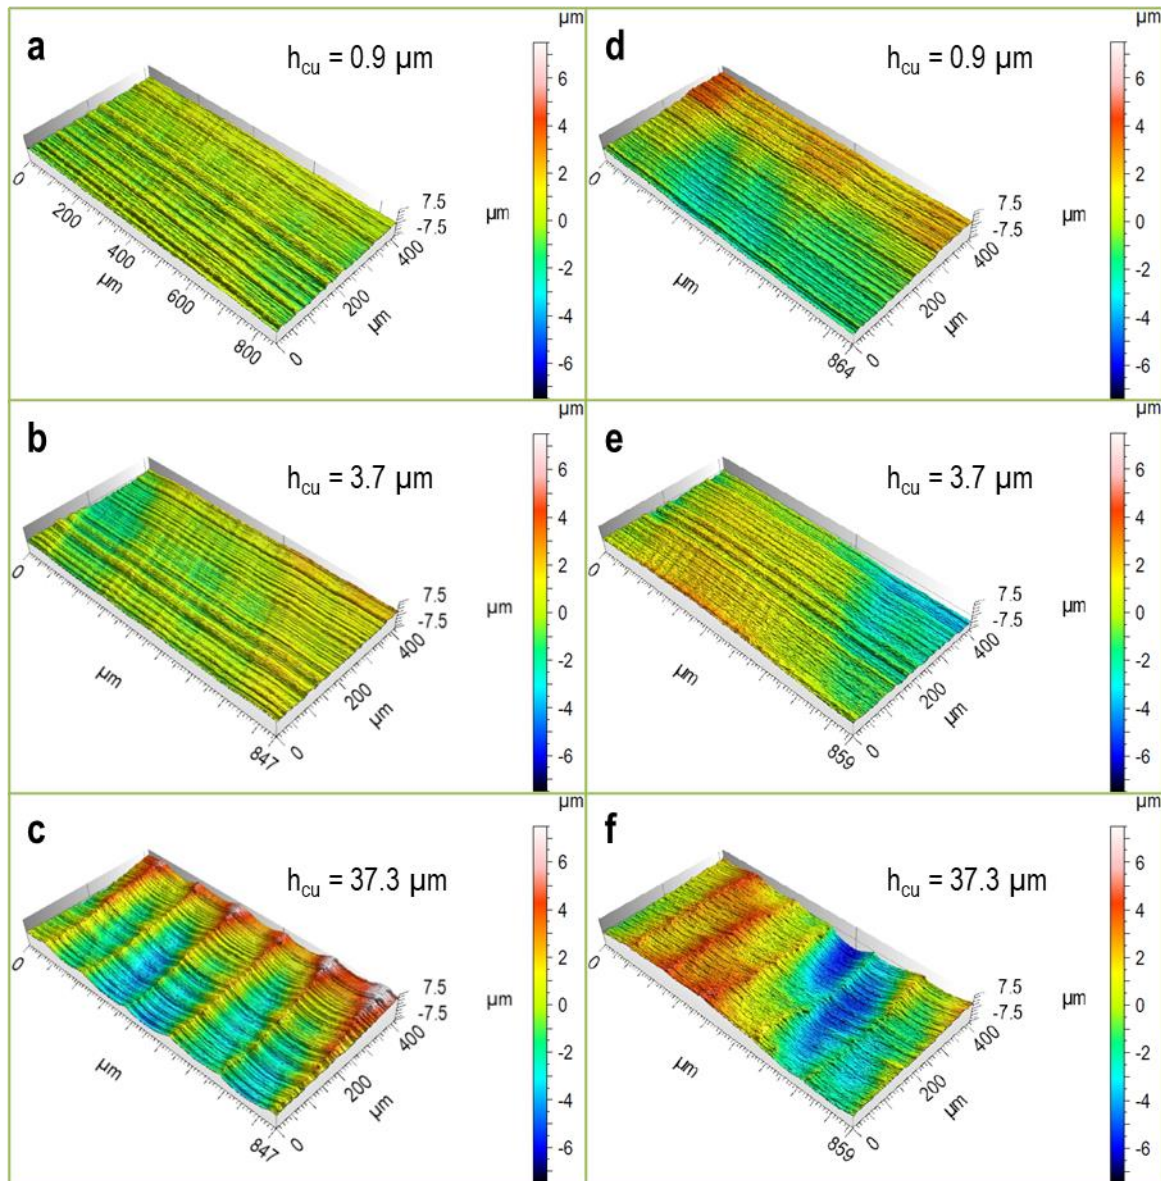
Confocal microscopy of the machined surface of EBM (a-c) and extruded (d-f) parts at a cutting speed of $v_c = 35\text{m/min}$.
